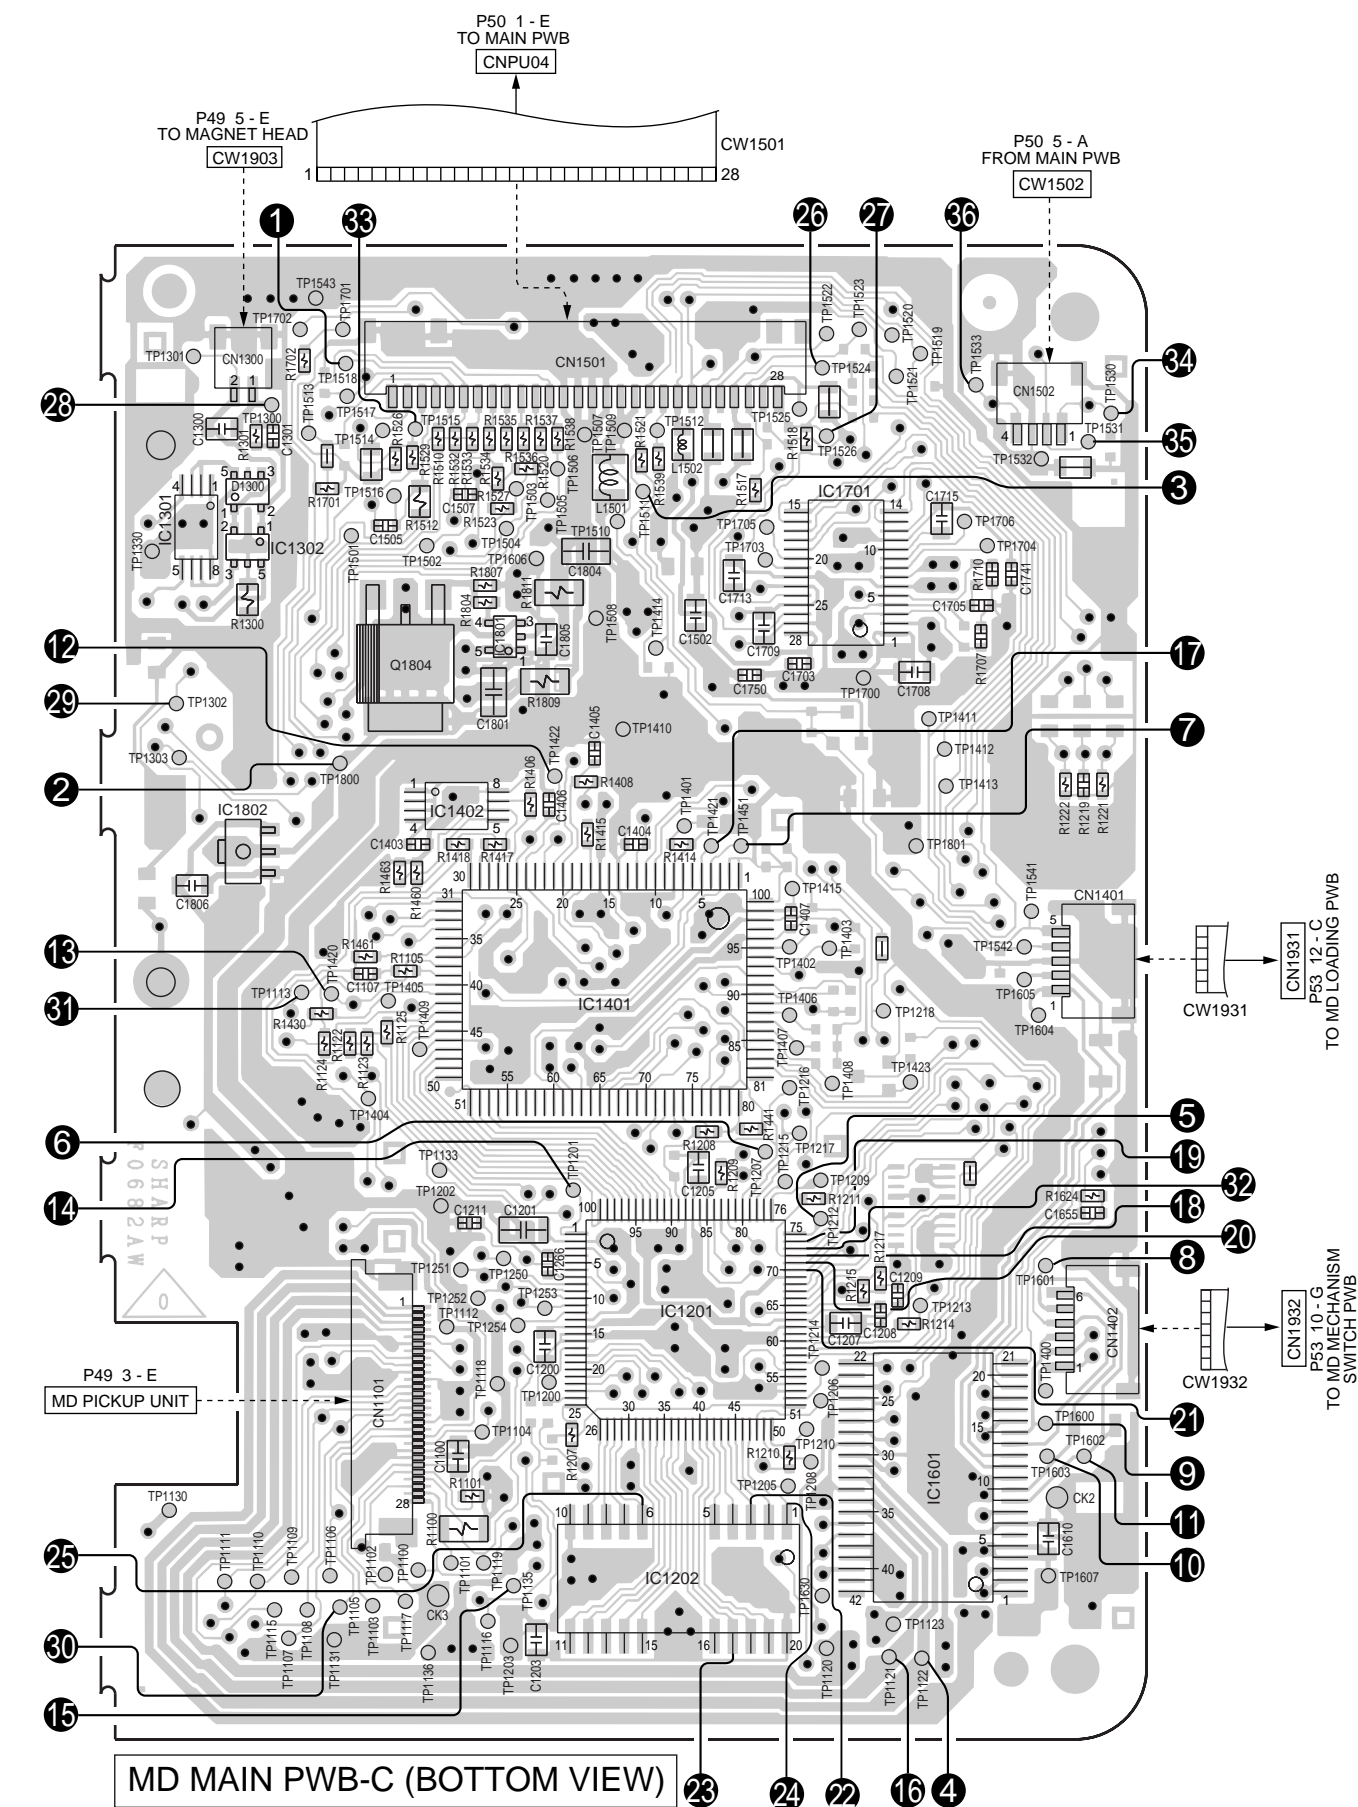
WIRING SIDE OF P.W.BOARD (11/11)
